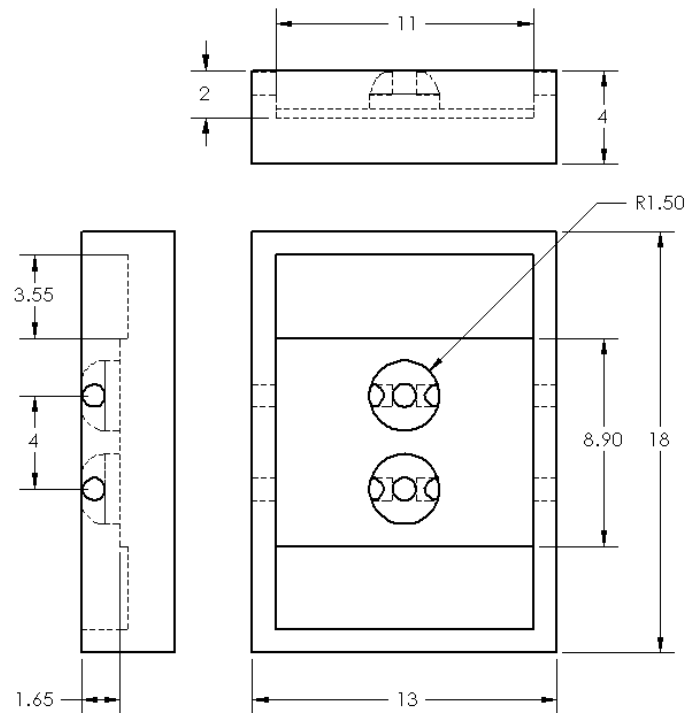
Schematic diagram of mould for SAW device flow cell. All dimensions are in millimetres.
